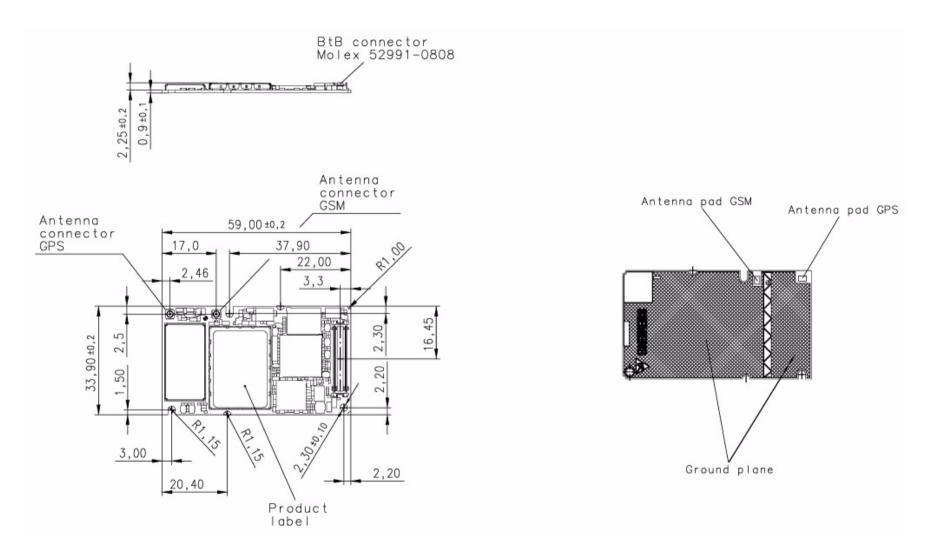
Dimensions of XT65/XT75 (all dimensions in mm)
